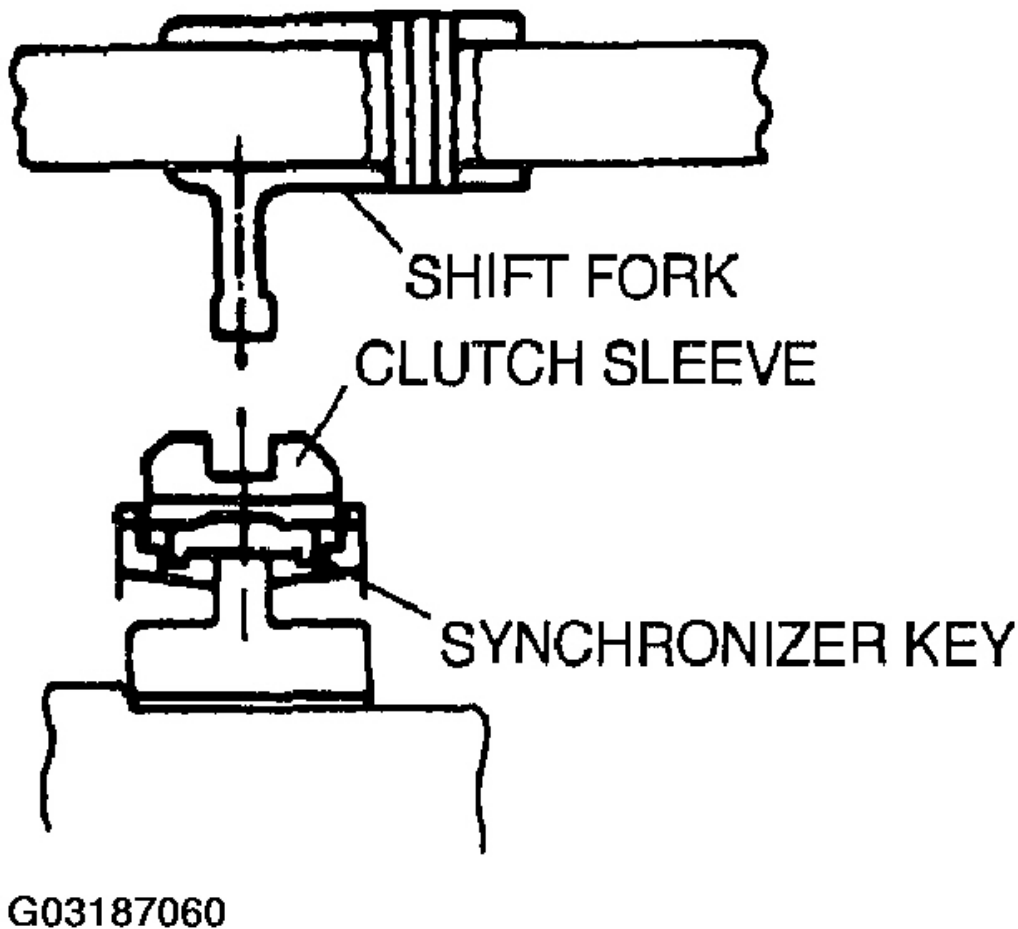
Verifying Centers Of Shift Fork & Clutch Hub Sleeve Are Aligned Properly
